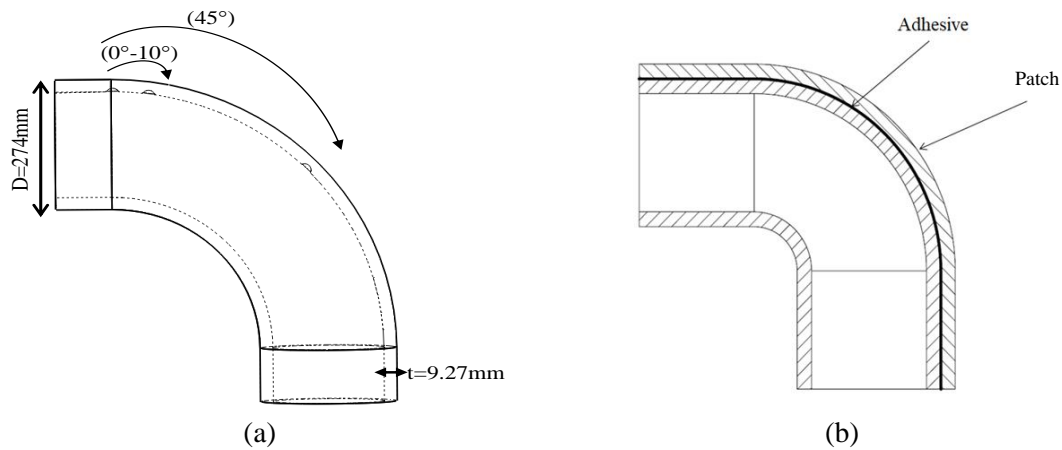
Geometry of corroded elbow: (a) Critical positions of defect at elbow and (b) Pipe elbow repair by patch
